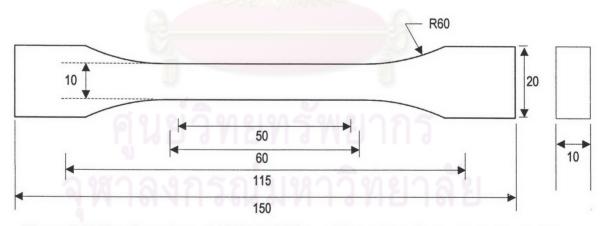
The dimensions of ASTM D638M type MI specimen for tensile testing (unit in millimeter).
